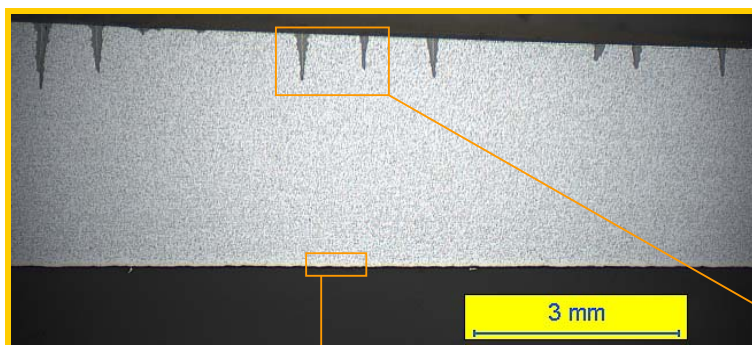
Cross section 1. Same macro as in fig.7 at higher magnification. Several cracks, filled with oxides/corrosion products, initiated from gas-side. The cracks were wedge-like with a direction perpendicular to the tube surface.
